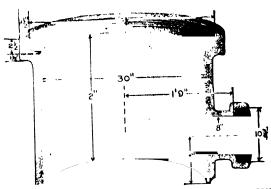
, ACID PROOF TOWER TOP OR BOTTOM SECTION
